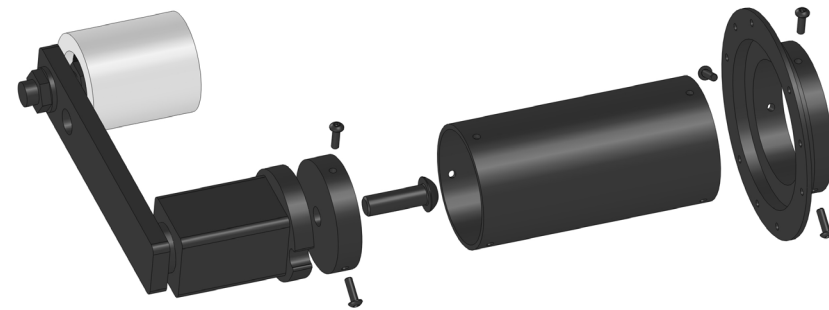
Exploded view of belt tensioner with custom mounting shaft
